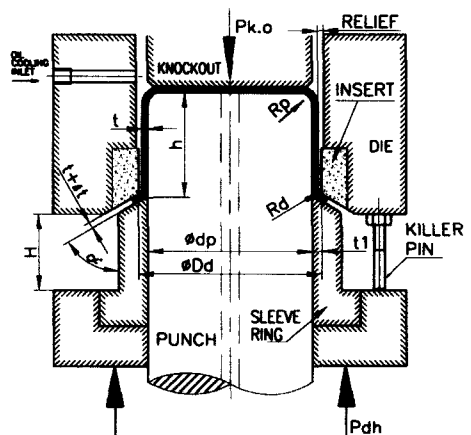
Redrawing die geometry of severe deep drawing for complex cylindrical housing
